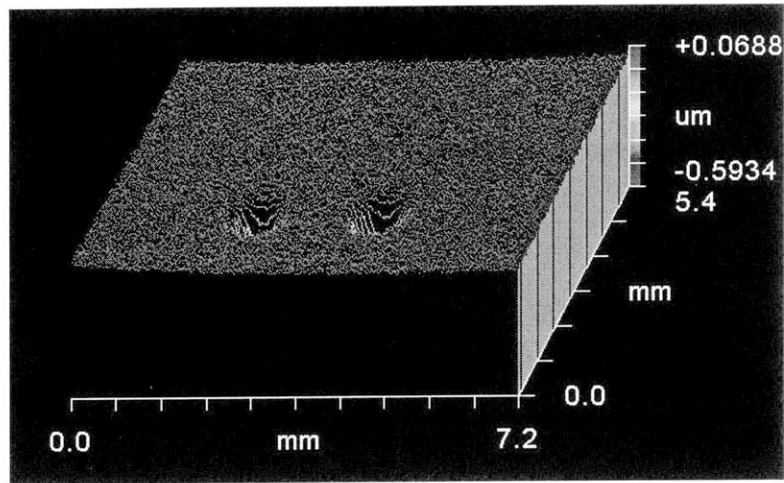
Zygo scan of surface of machined Pyrex wafer.
